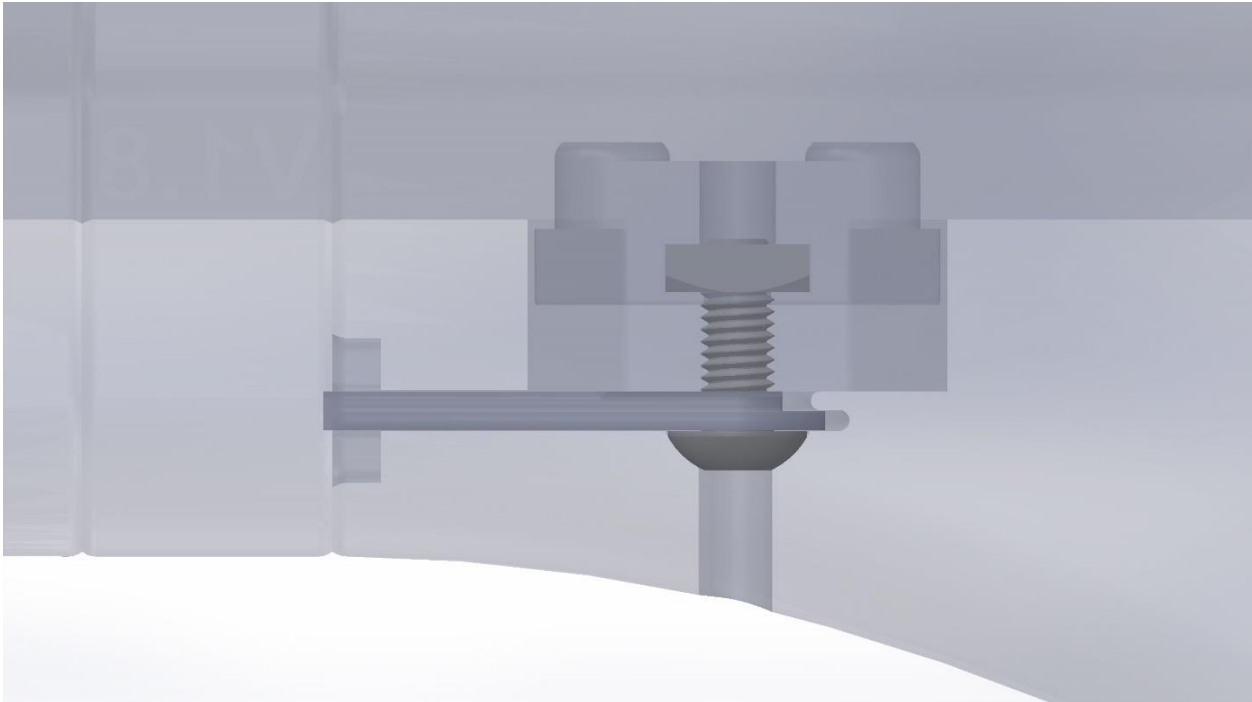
Retention Assembly. The screw head is held into its pocket by the plate.
